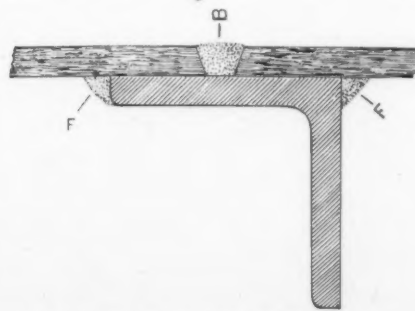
FLAT (B) AND OVERHEAD (F) WELDS
